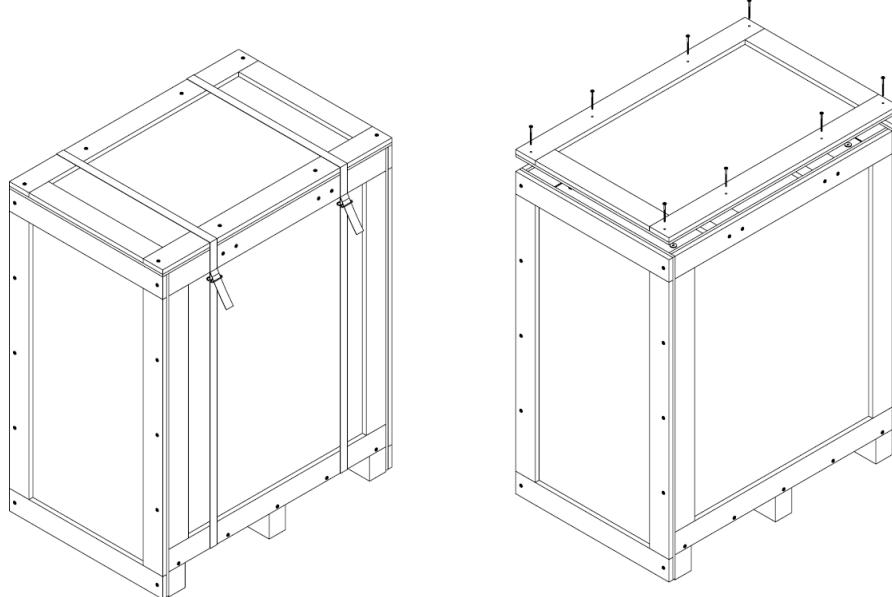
GSPS Unpack – Disassemble Top Cover, Accessories Box
